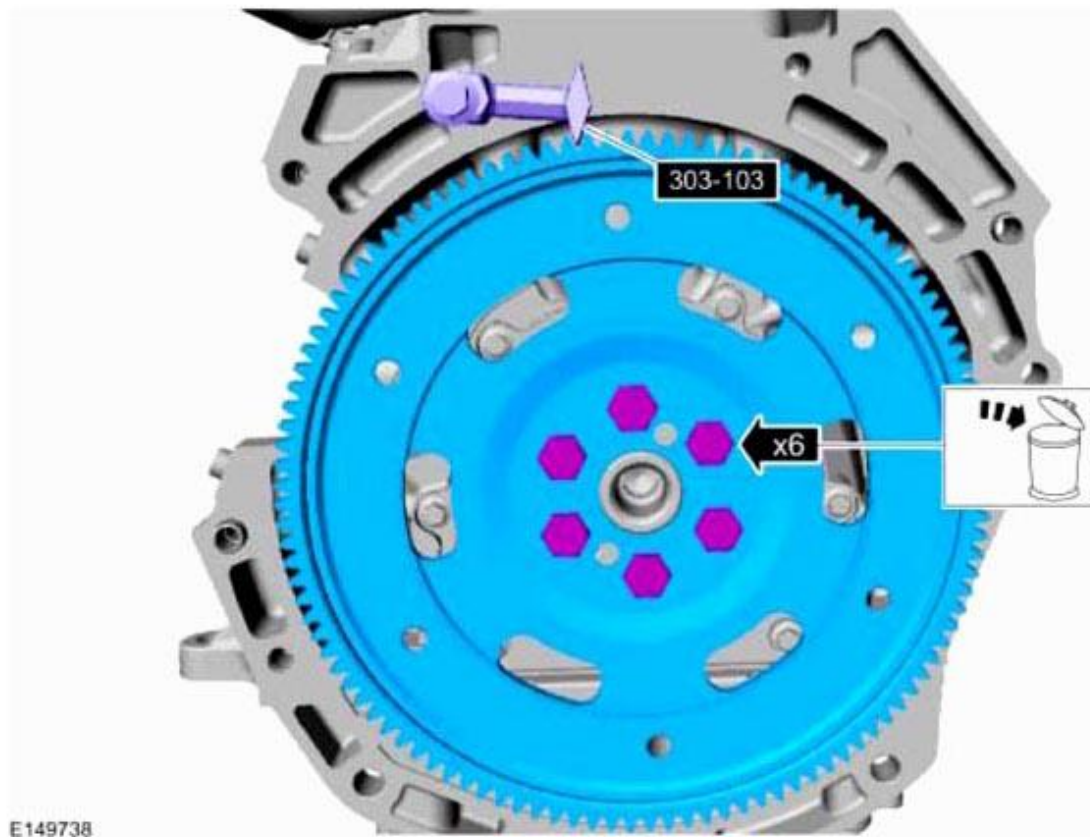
Locating Flywheel Bolts And 303-103 (Flywheel Holding Tool)
